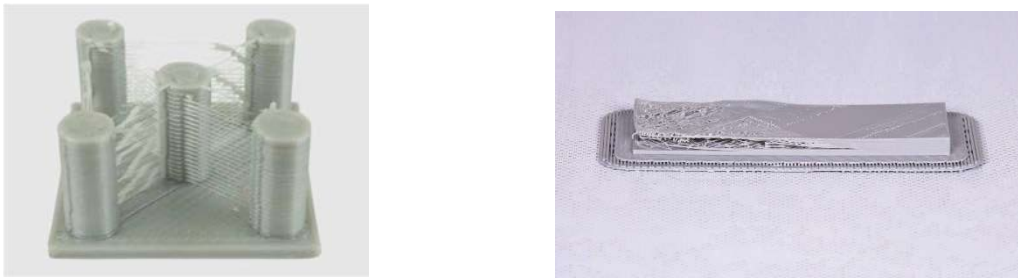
Manufacturing defects due to Hot End Assembly dysfunction and poor retraction
